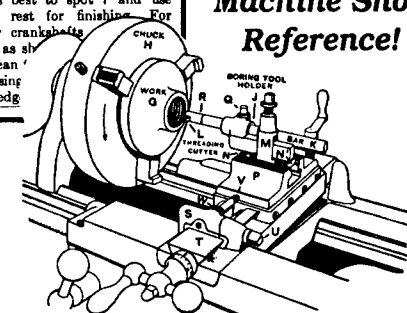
INSIDE THREADING IN ENGINE LATHE.
